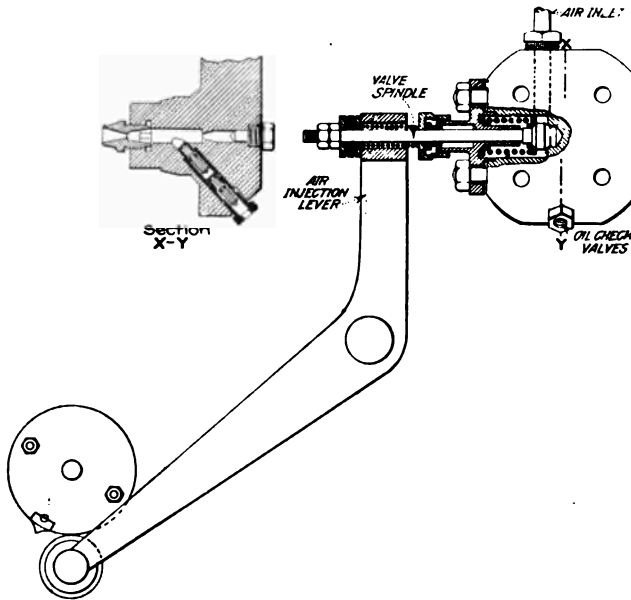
Allis-Chalmers Diesel fuel valve.
